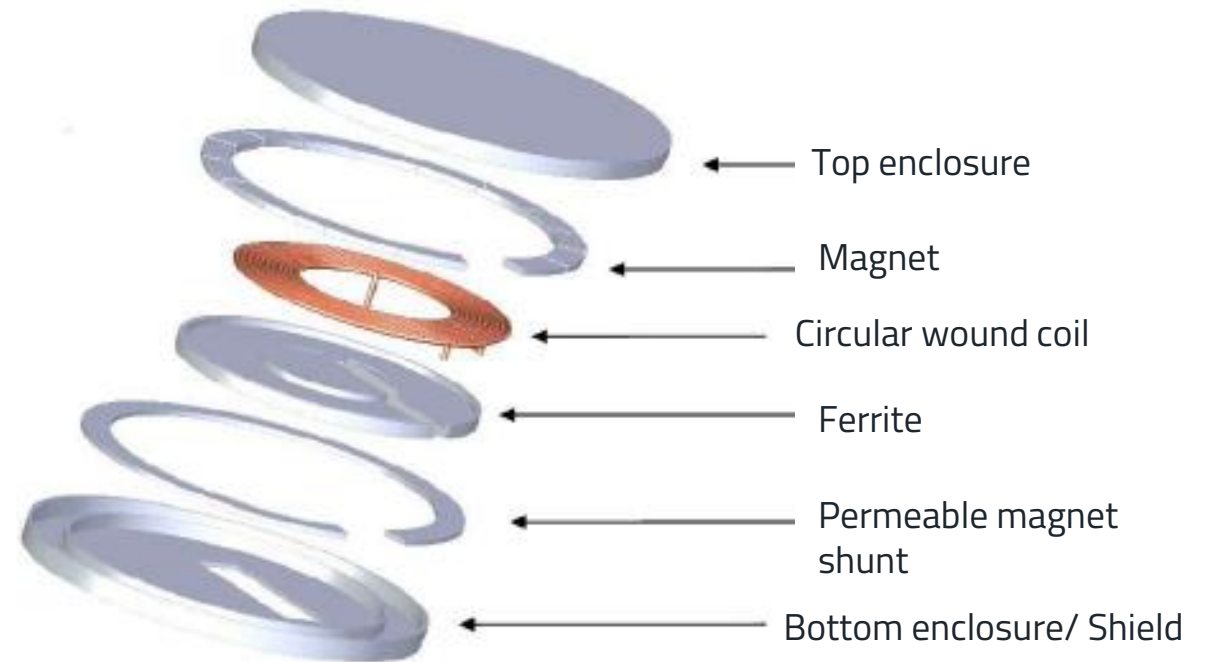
Exploded view of Ptx (750371632) WE-coil system model
